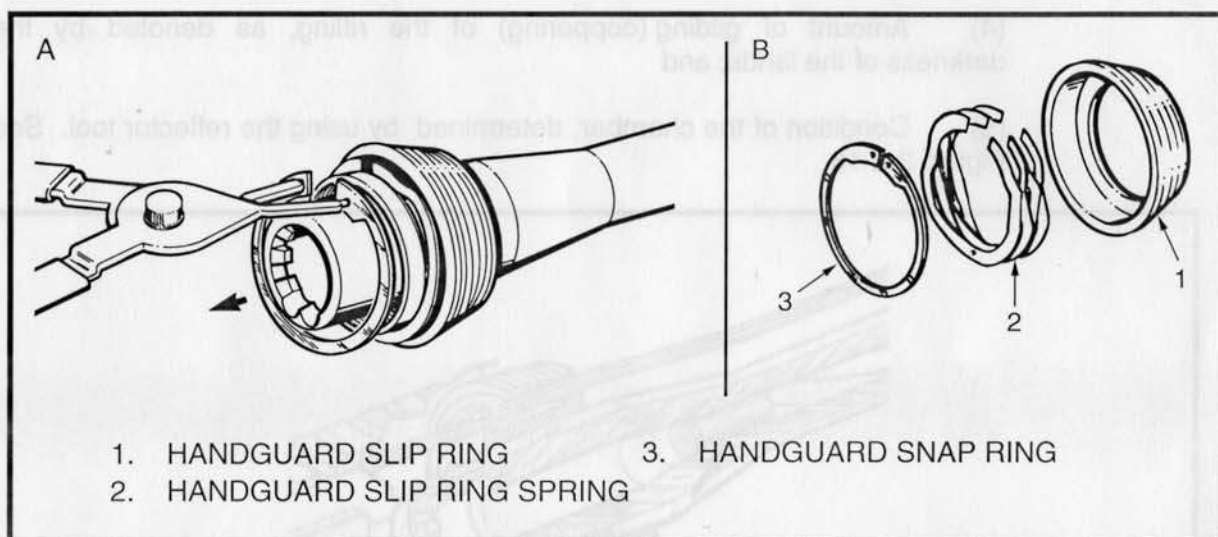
Disassembly of the Barrel Nut Assembly
